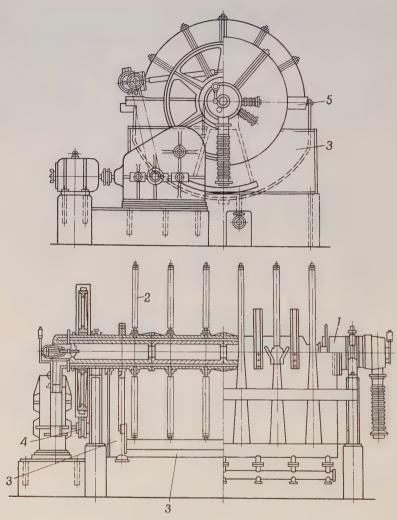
Rotary disk vacuum filter: 1—shaft; 2—disks; 3—tank; 4—drive; 5—cake scalper
